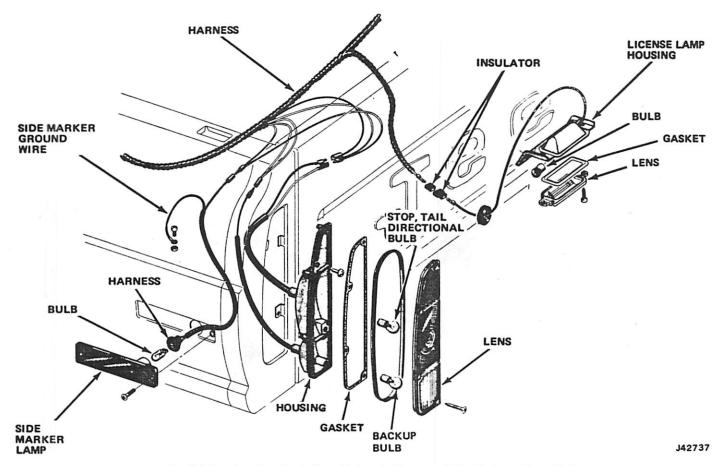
R-10 Rear Directional, Stop, Backup, Taillamps and Side Marker—Townside Truck
